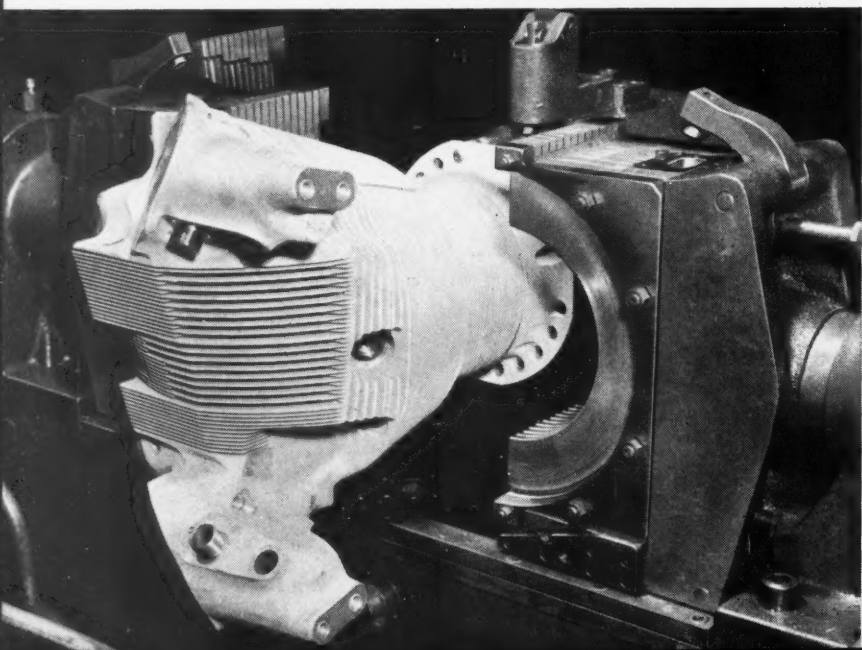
Aluminum air cooling fins are inserted in tapered grooves in cylinder barrels by means of a hydraulic machine especially designed for the purpose
